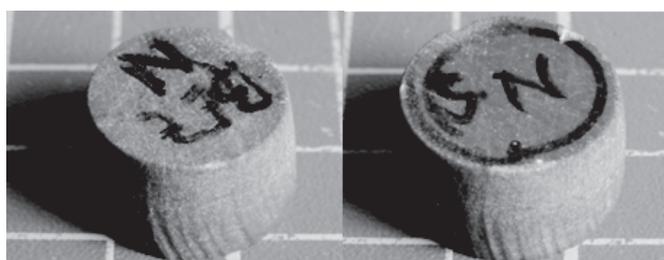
Column cut without AWJ head tilting (left) and with tilting (right)
